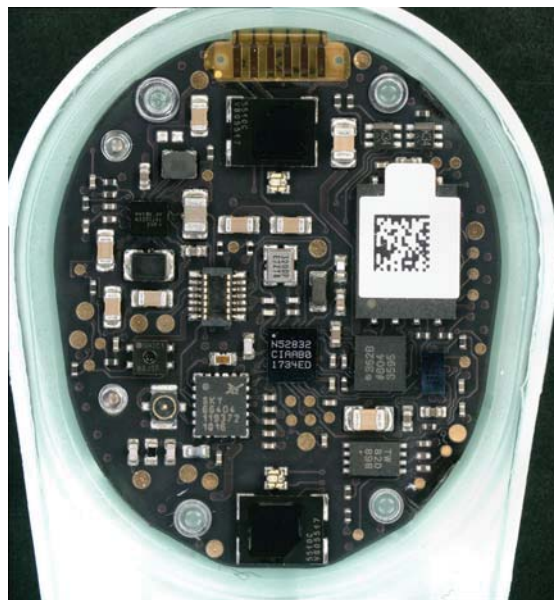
Lumi Soft Touch Sensor – Internal Photo – Bottom View
